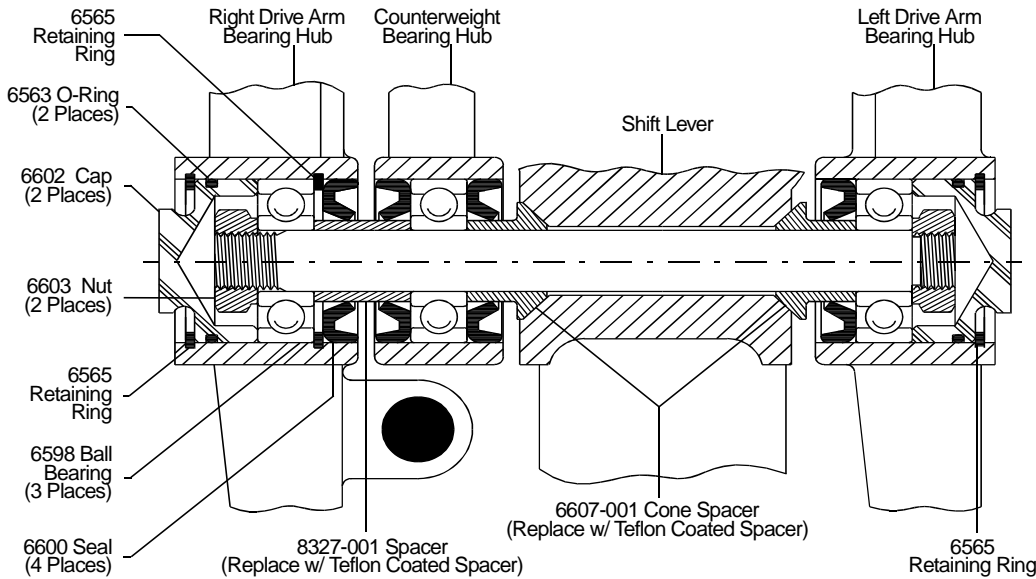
Section View of Drive Arm and Counter Weight Assembly.
